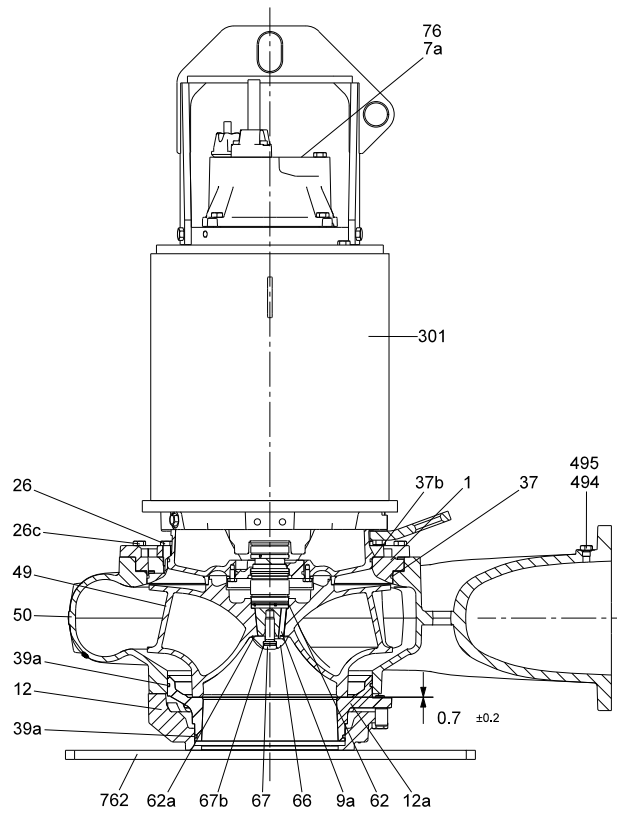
Installation type D, dry, vertical pump on base plate - version 1
